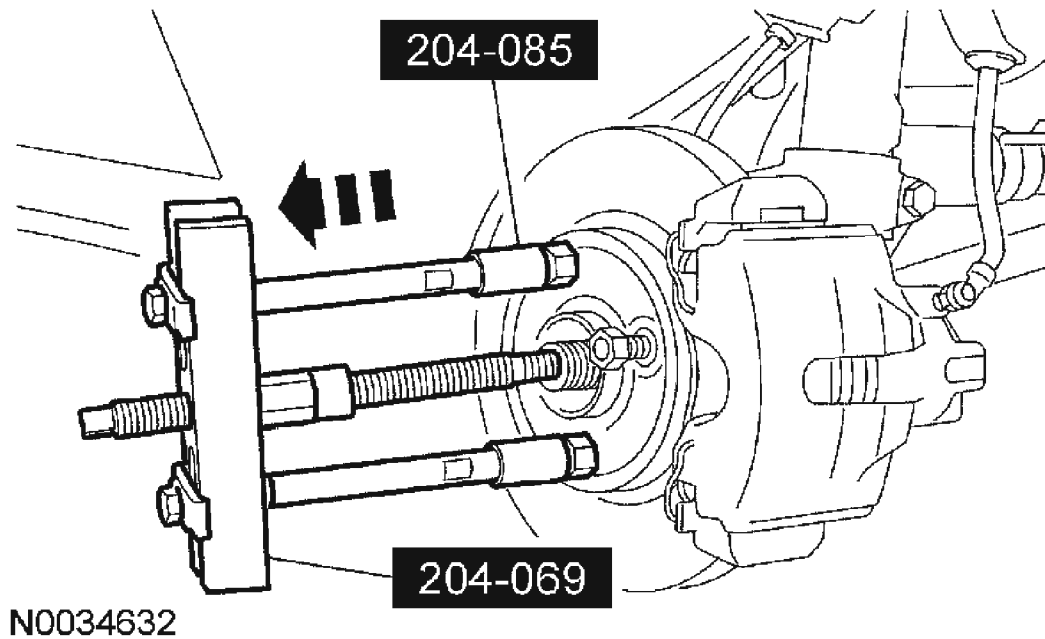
Using Puller To Press Out The Halfshaft Stub From Wheel Hub
